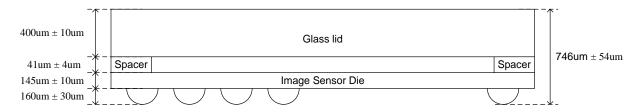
ASSEMBLY DRAWING OF CMV300
